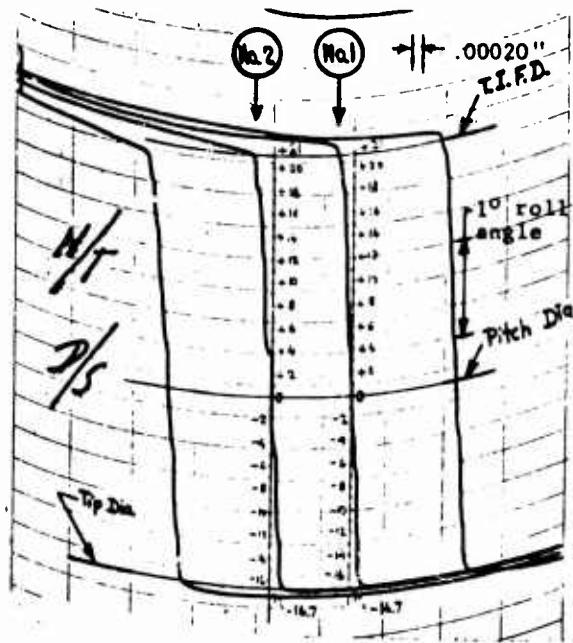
Gear Tooth Profile Measurements on the Ring Gear.
